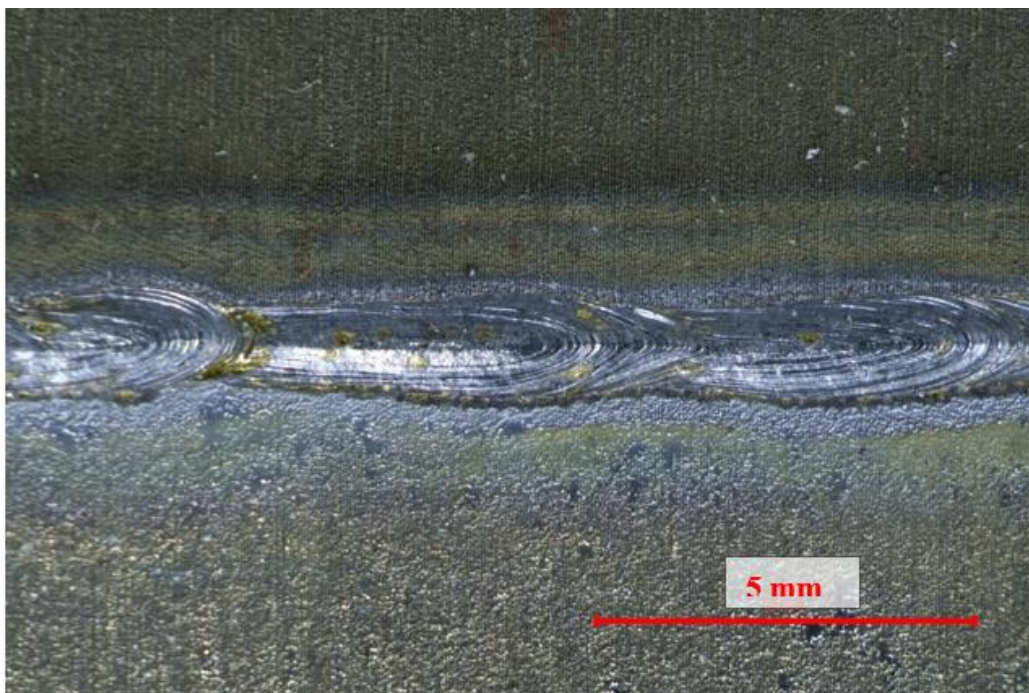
Welded sample with laser cleaning as a pre-treatment.
